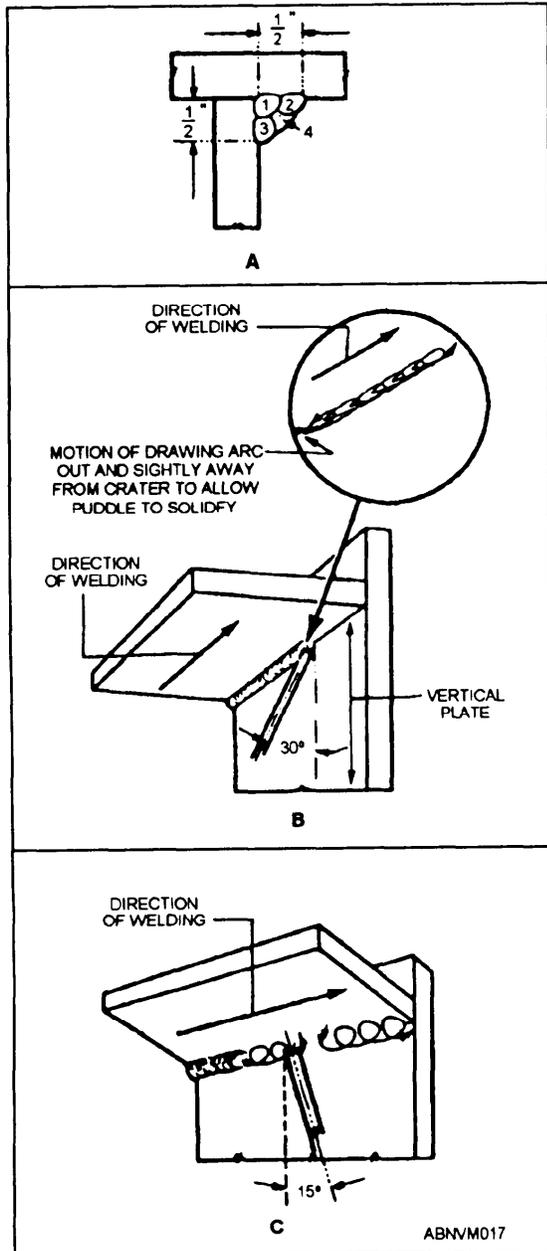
Fillet welding of a T-joint in the overhead position.
